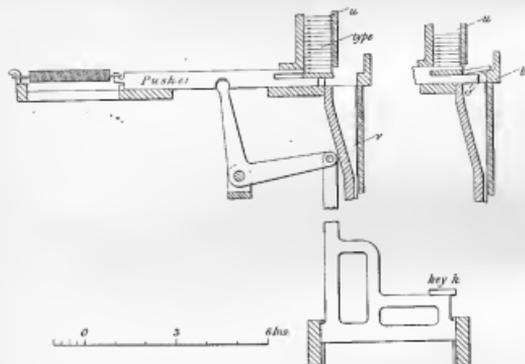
Kastenbein composing machine; type-facing mechanism.
